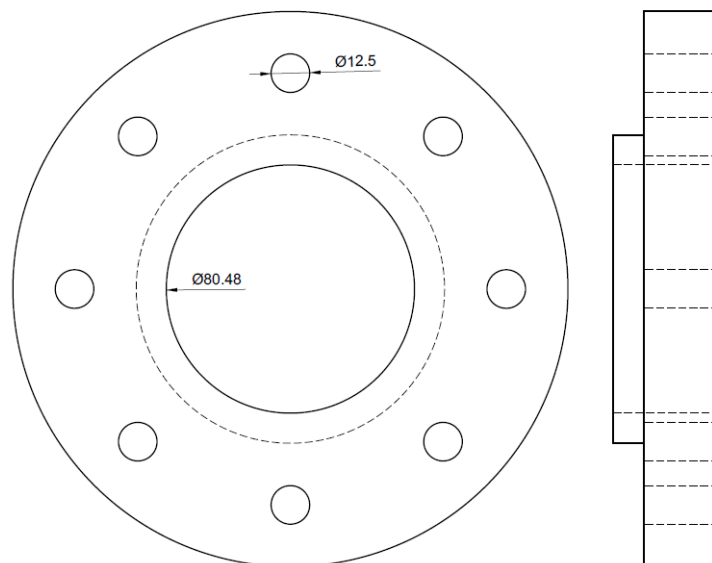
Flange (for fitting to the top and bottom of barrel)
